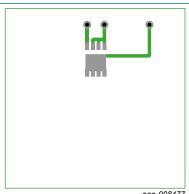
PCB layout for thermal resistance junction to ambient minimum footprint; FR4 Board; 2oz copper
